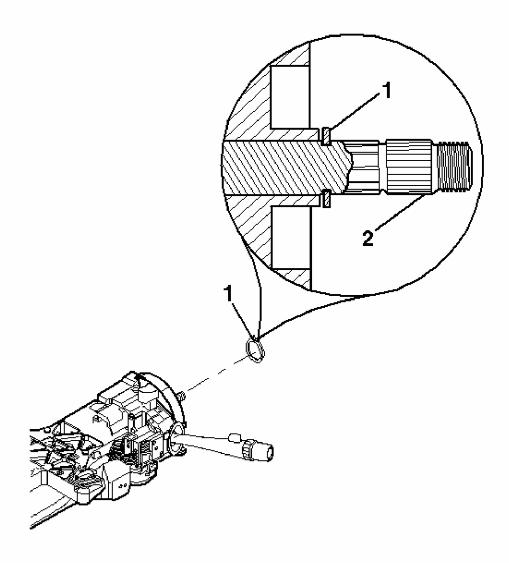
Installing Retaining Ring Courtesy of GENERAL MOTORS CORP.
